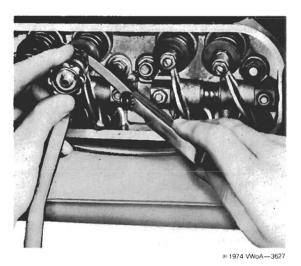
Clearance between rocker and valve stem tip being adjusted. Note feeler gauge and combination wrench and screwdriver being used.
